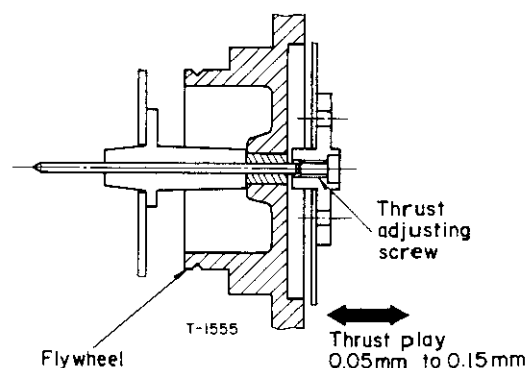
Capstan Ass'y Thrust Adjustment
